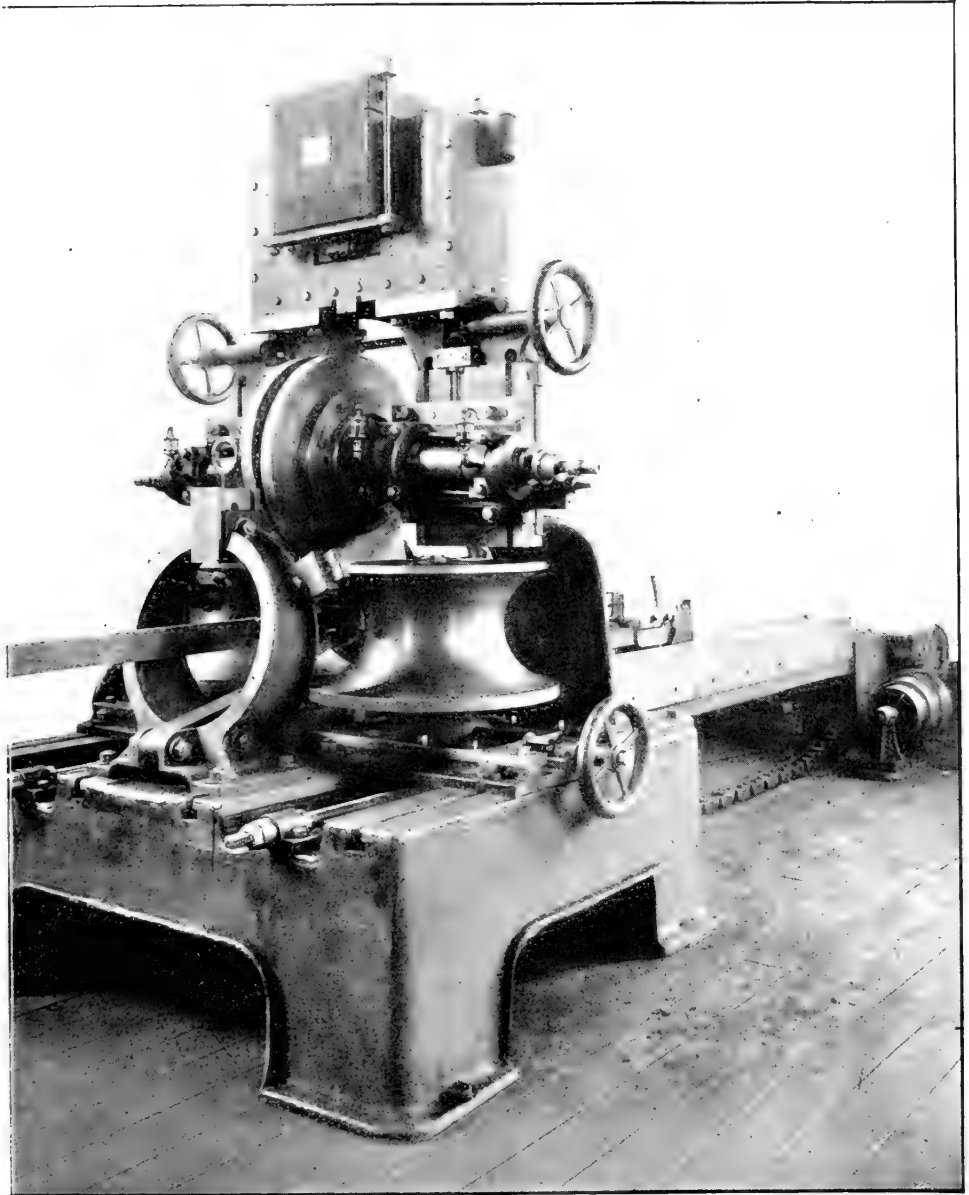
AN ELECTRIC CHAIN-WELDING MACHINE.
